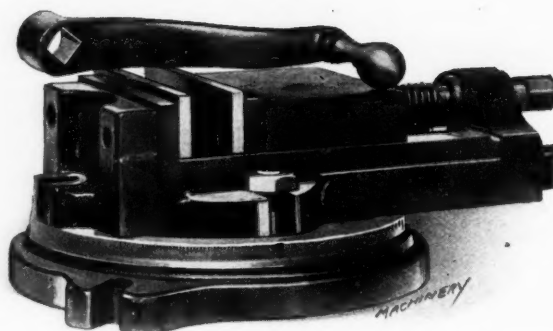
Close View of Bickford Swivel Base Vise shown on Machine in Fig. 1
